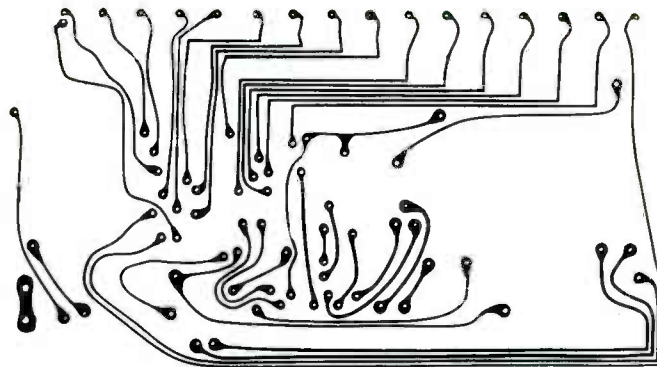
FOR SIMPLICITY IN MAKING THE BOARDS, neither of the double-sided boards uses plated-through holes. The foil pattern for the component side of the second double-sided board, Board 2, is shown here. Once again, that board is shown here half-size.
